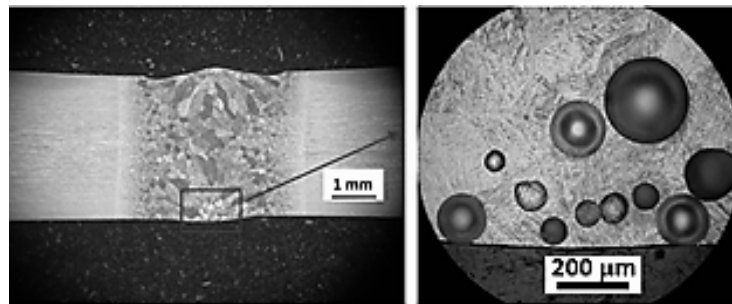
Porosity location for a specimen welded at 1750 W, 15 mm/s and -1.5 mm
